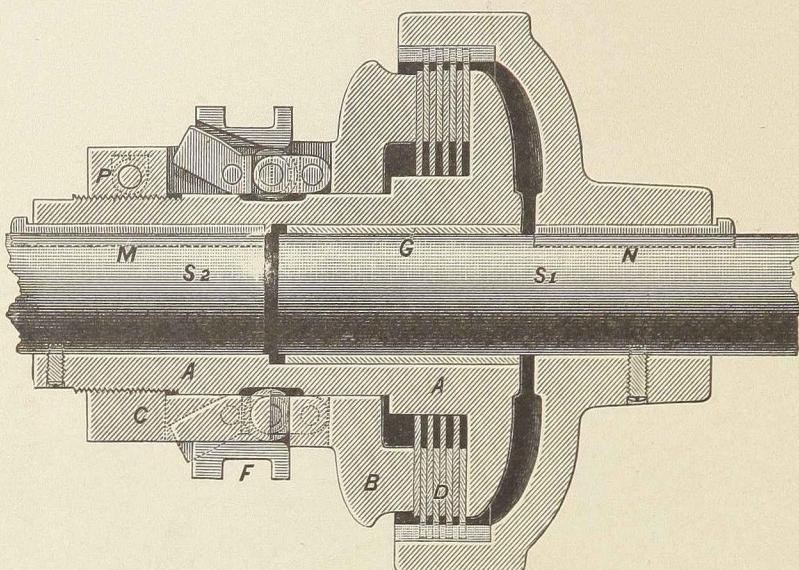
FIG. II. WESTON-CAPEN CUT-OFF COUPLING OR FRICTION CLUTCH.
